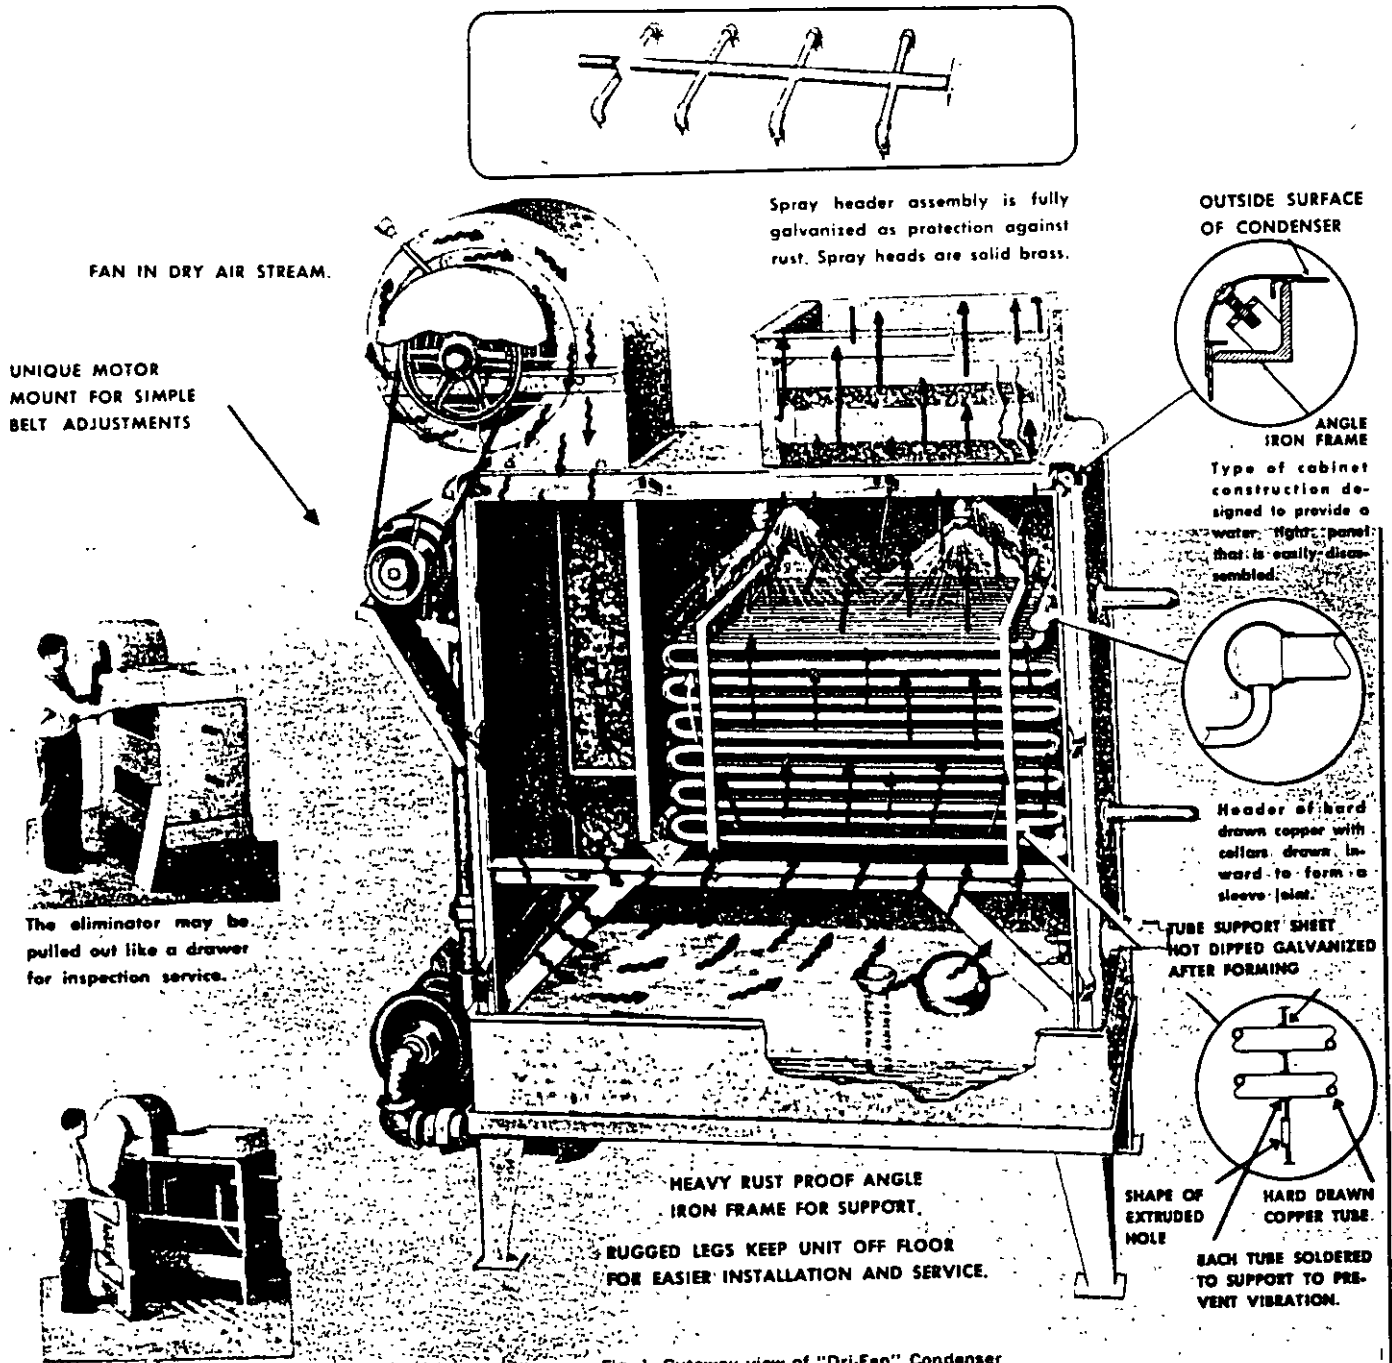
Cutaway view of "Dri-Fan" Condenser
